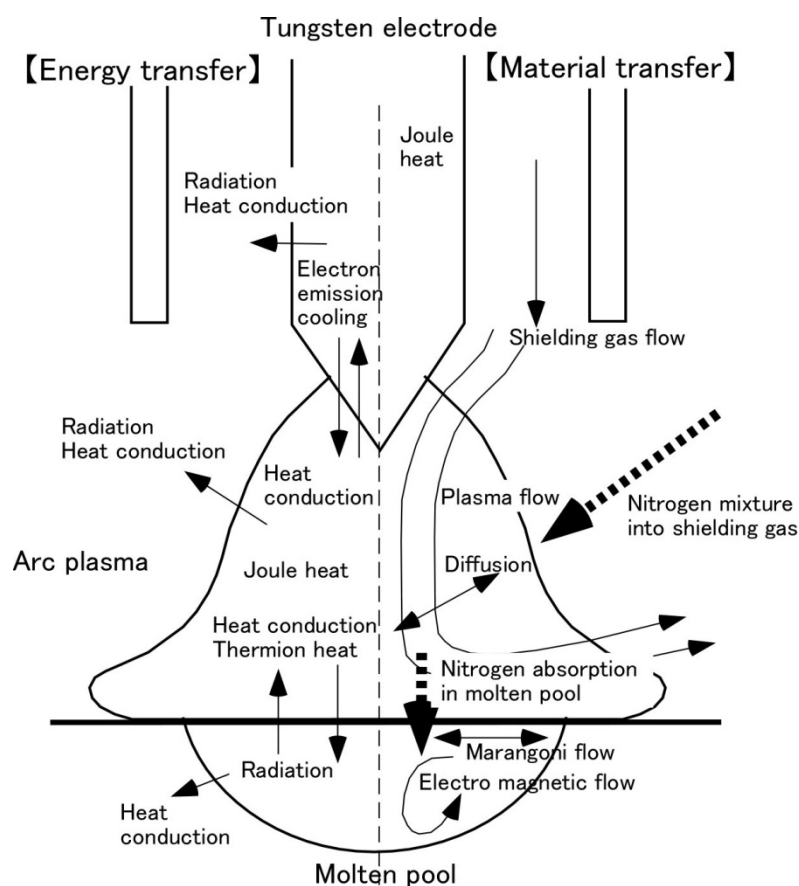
Schematic illustration of heat transfer and material transfer phenomenon in GTA welding.
